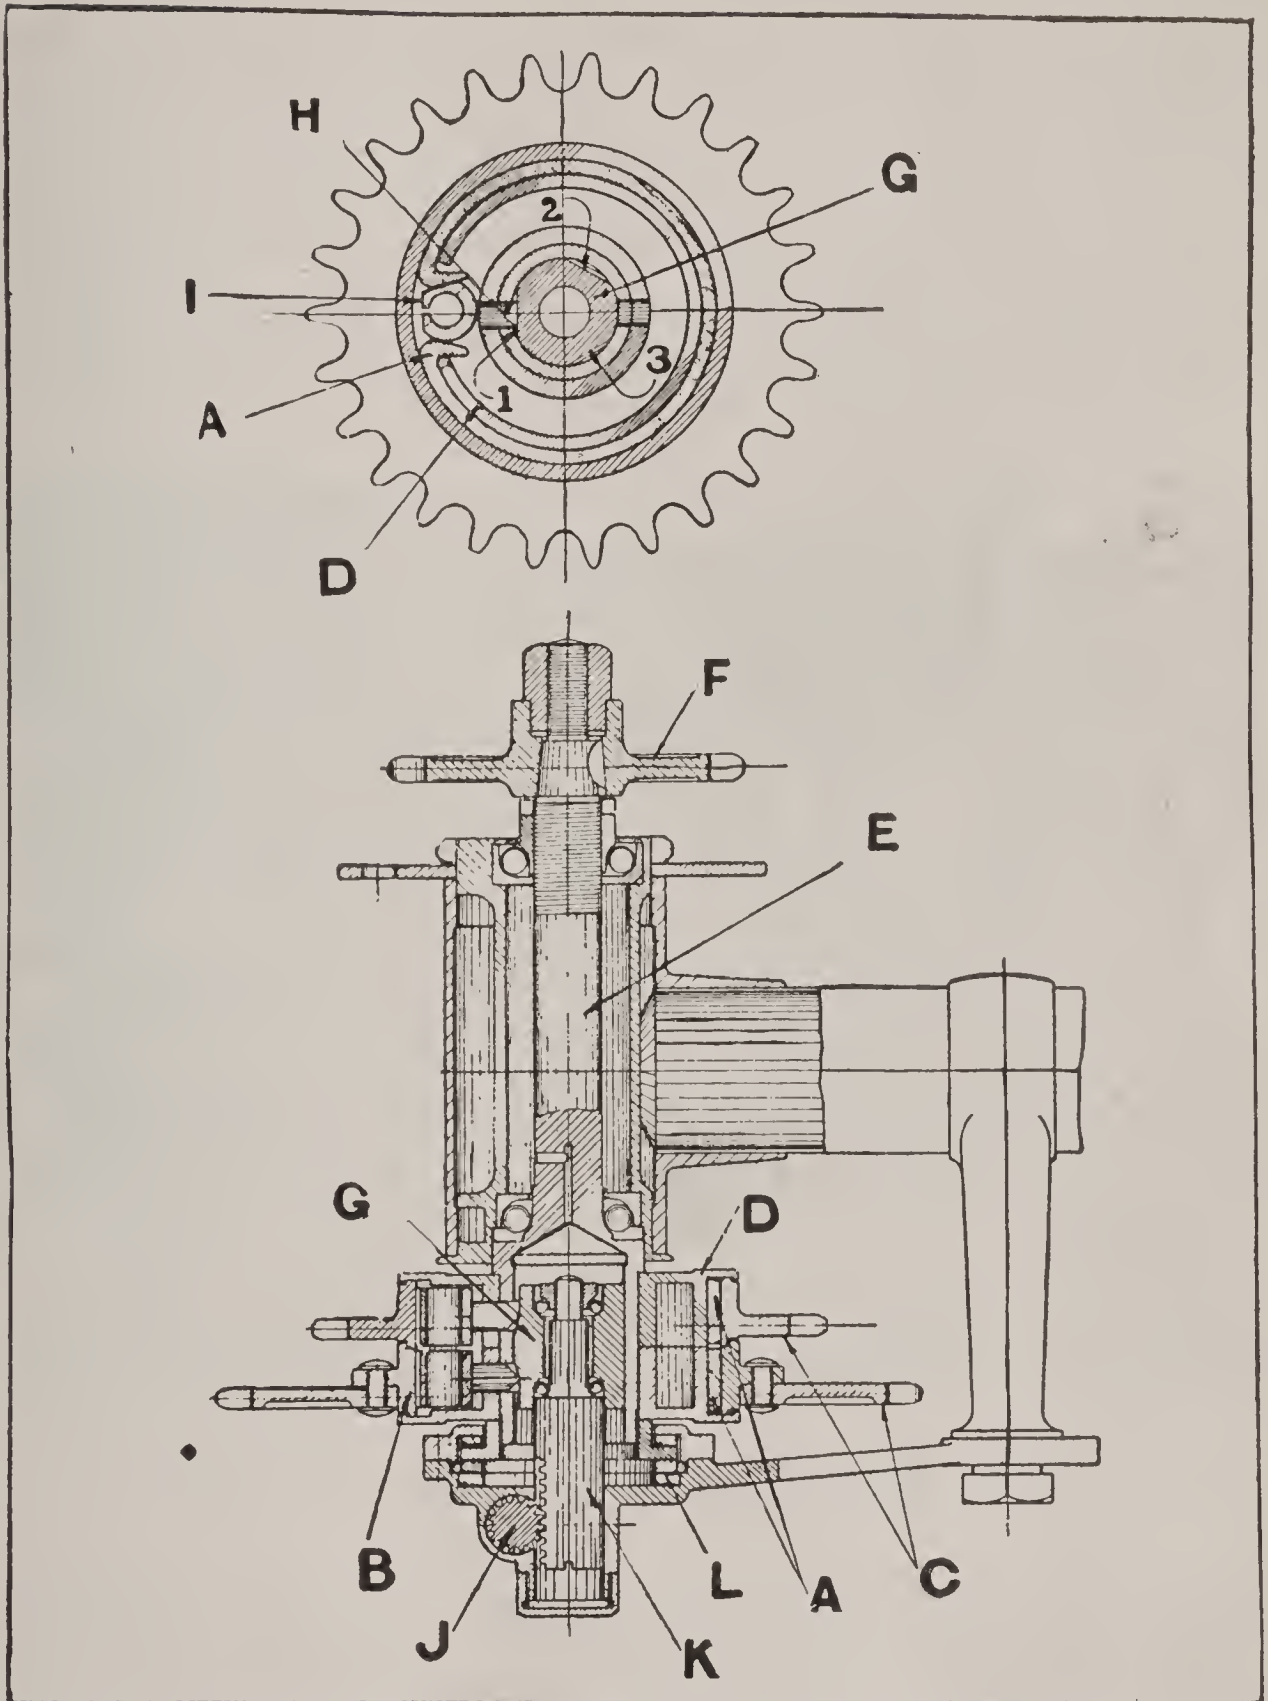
Two Speed Countershaft Gear Used on the Royal Enfield Motorcycle.
